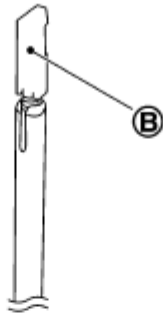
Identifying Key Interlock Rod, Pull Lock And Adjust Holder
